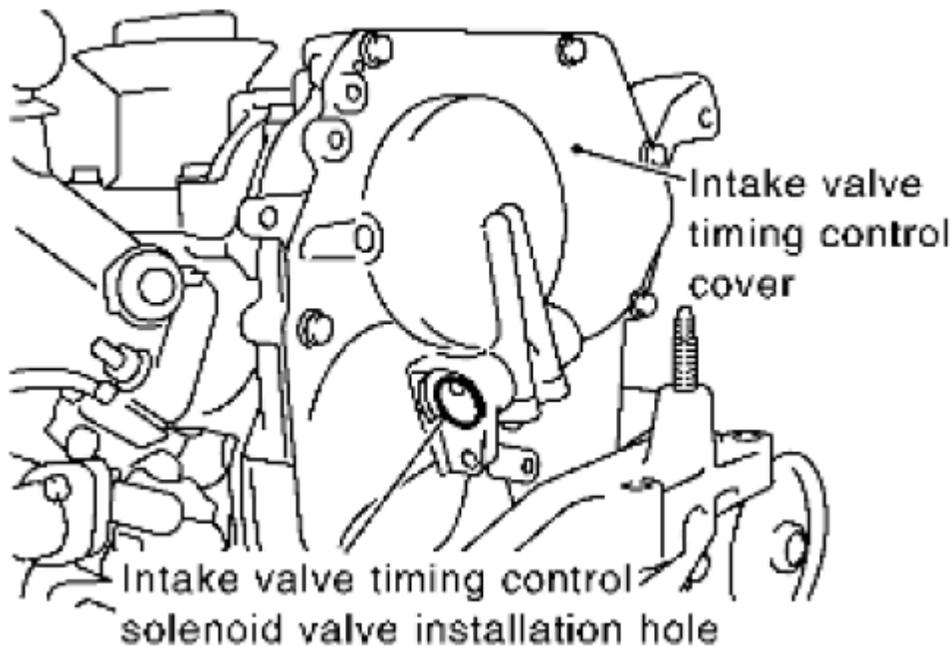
Identifying Intake Valve Timing Control Cover Oil Hole
